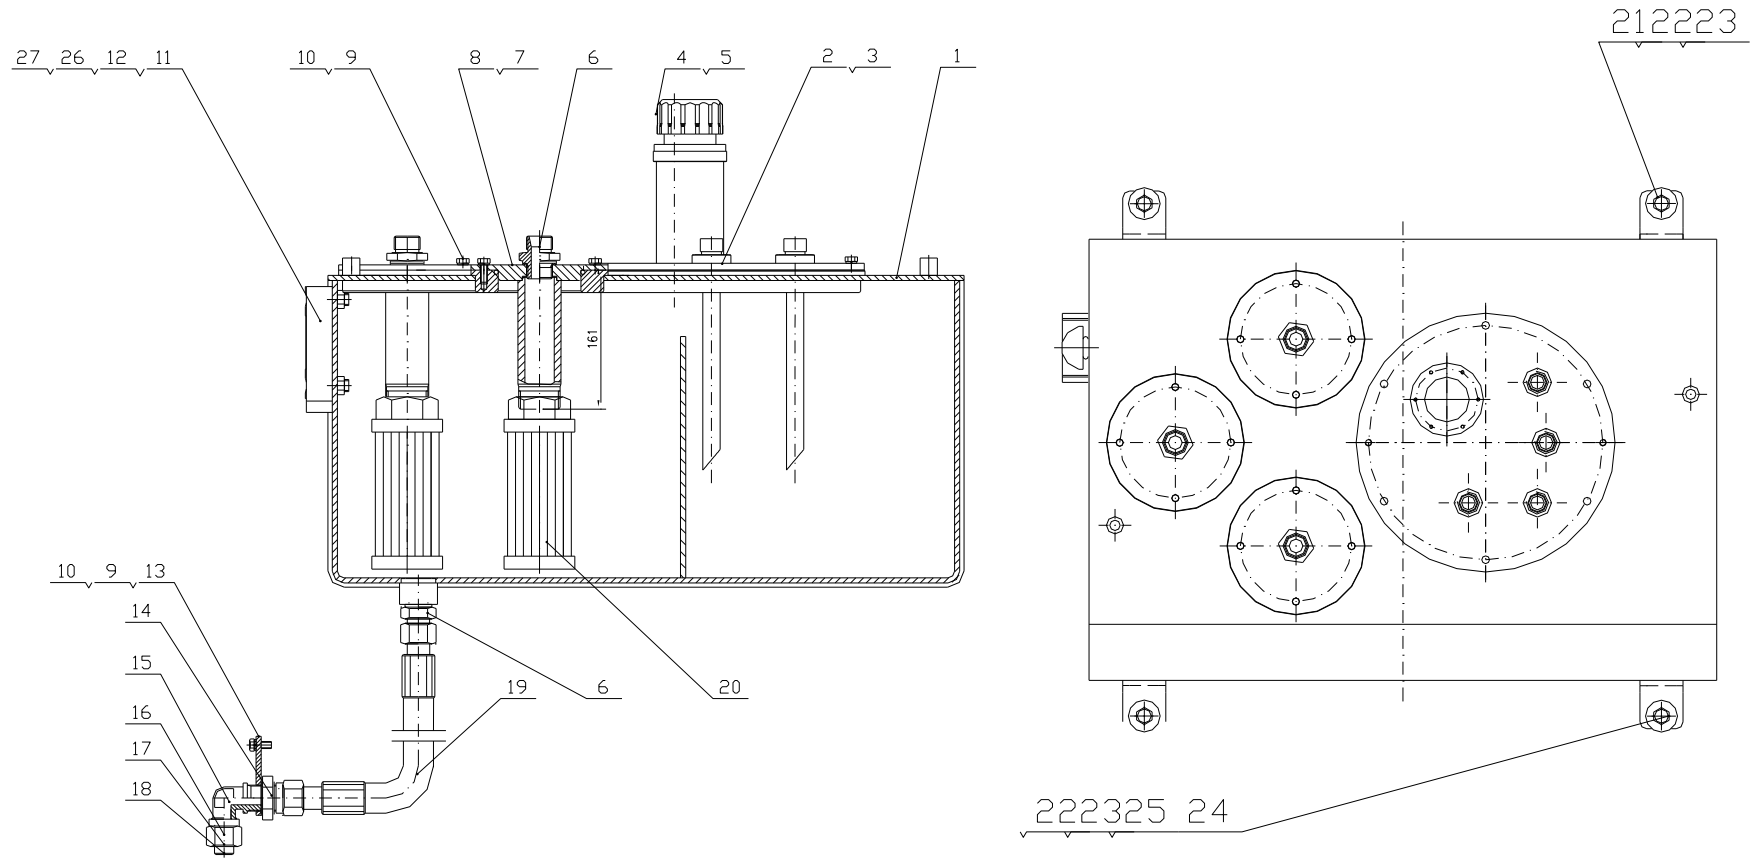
Hydraulic oil tank assembly 液压油箱总成			Remarks
